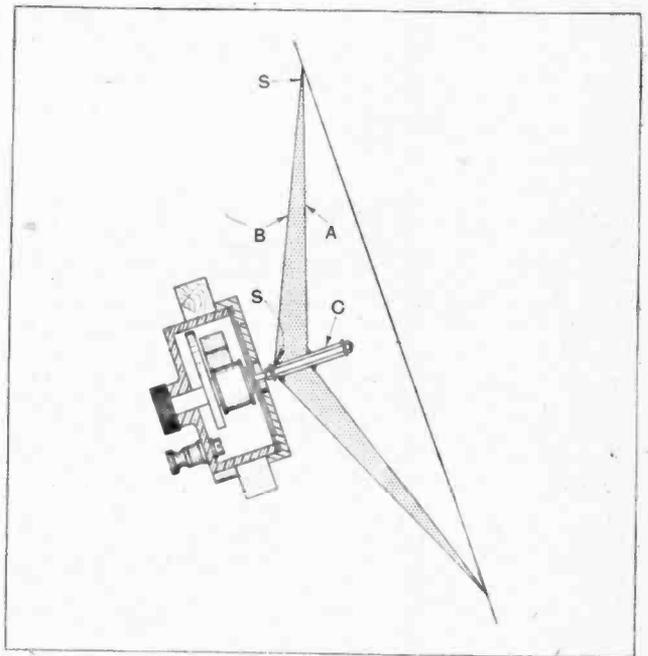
A section through the loud-speaker showing how the cones are fixed to the reed. A and B are the two cones, C, paper tube; S, seccotine.
